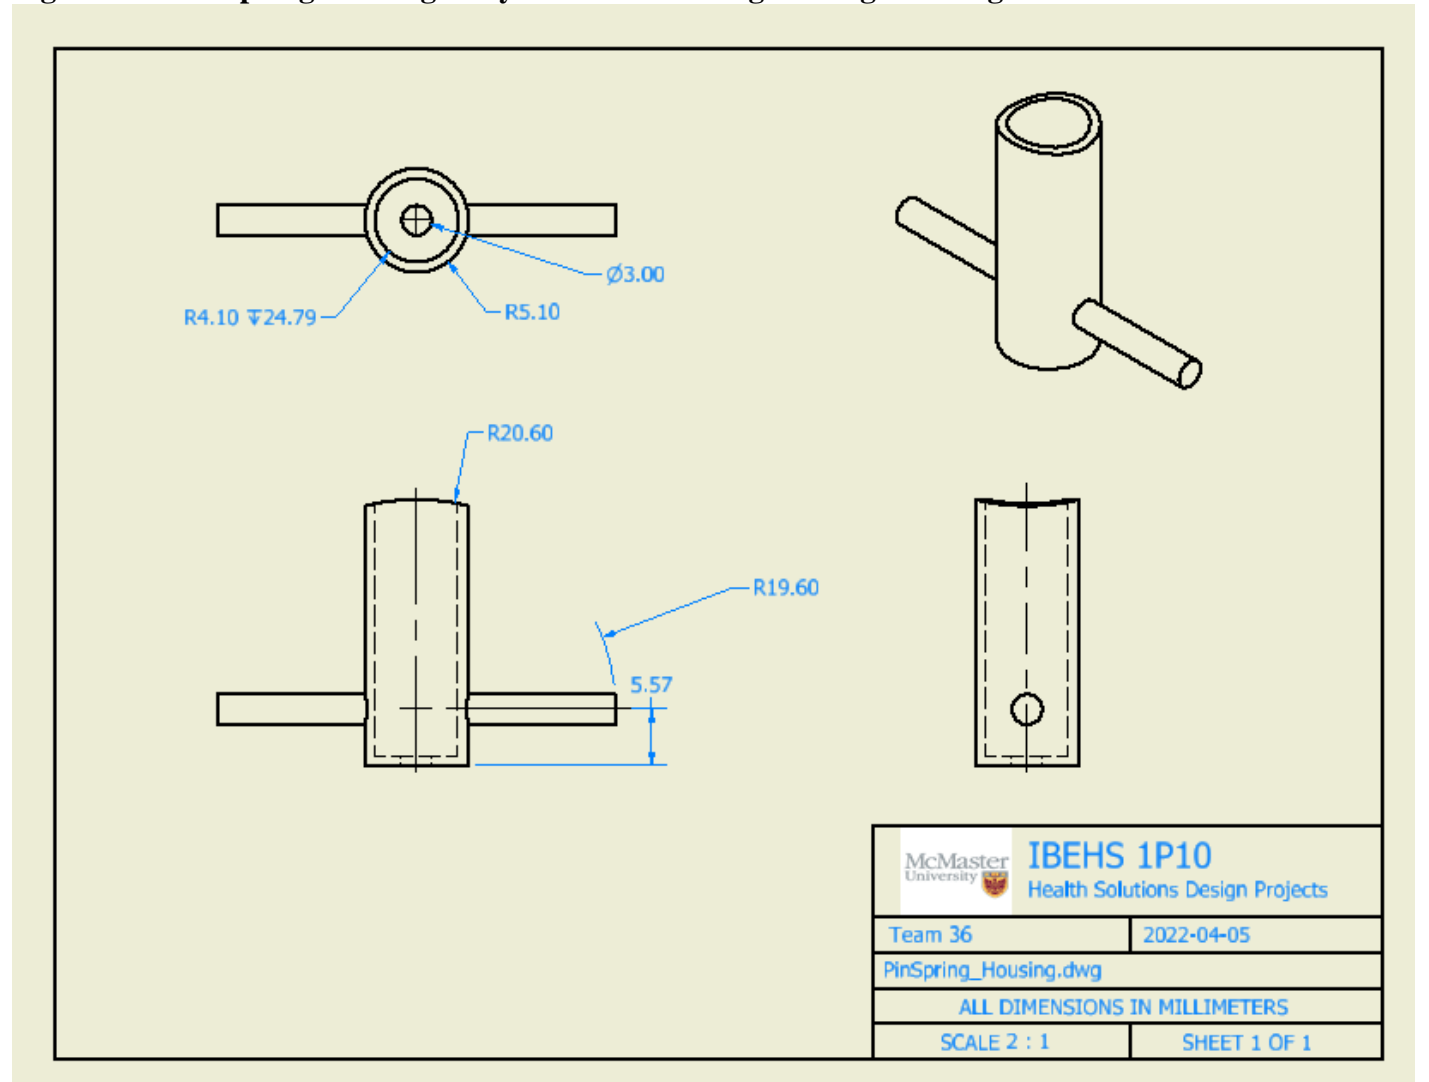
Pin/Spring Housing Fully Dimensioned Engineering Drawing
